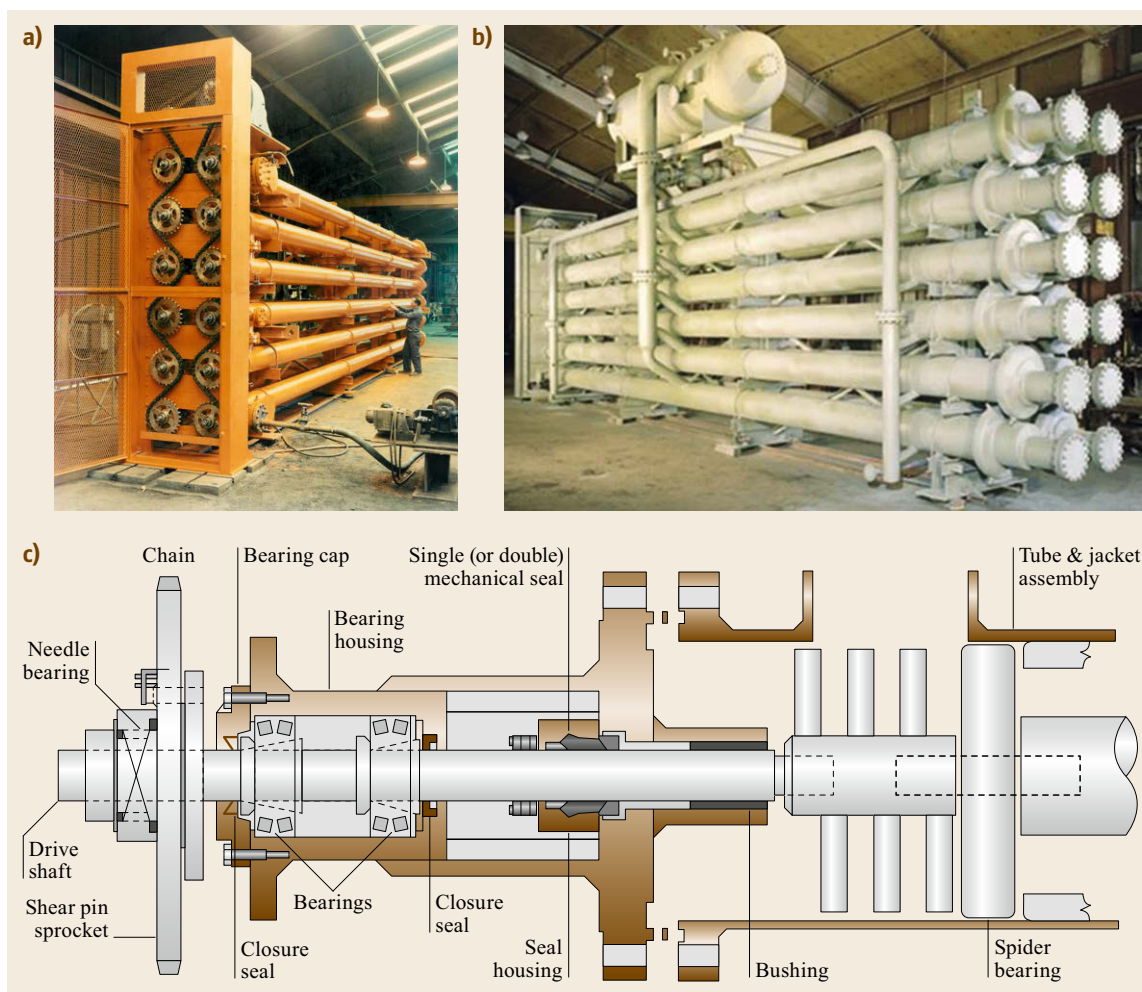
c Typical SSEs. View of SSE drive chain (a), view of chiller drum above SSE (b), SSE drive shaft bearing and seal assembly (c) (Photos courtesy of Armstrong)
